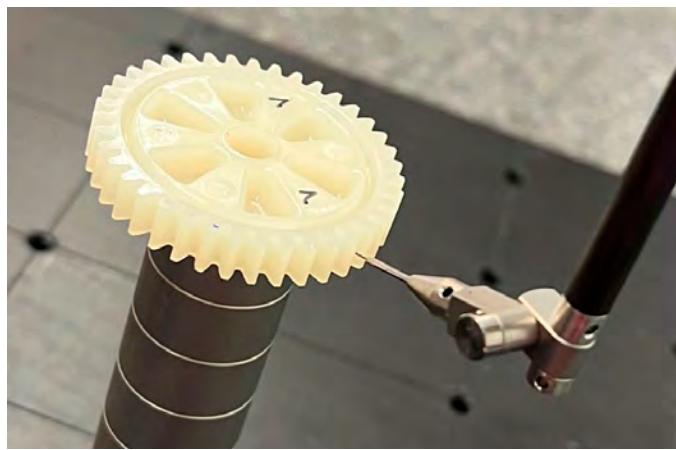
Geometric quality inspection on the plastic gear sample.
